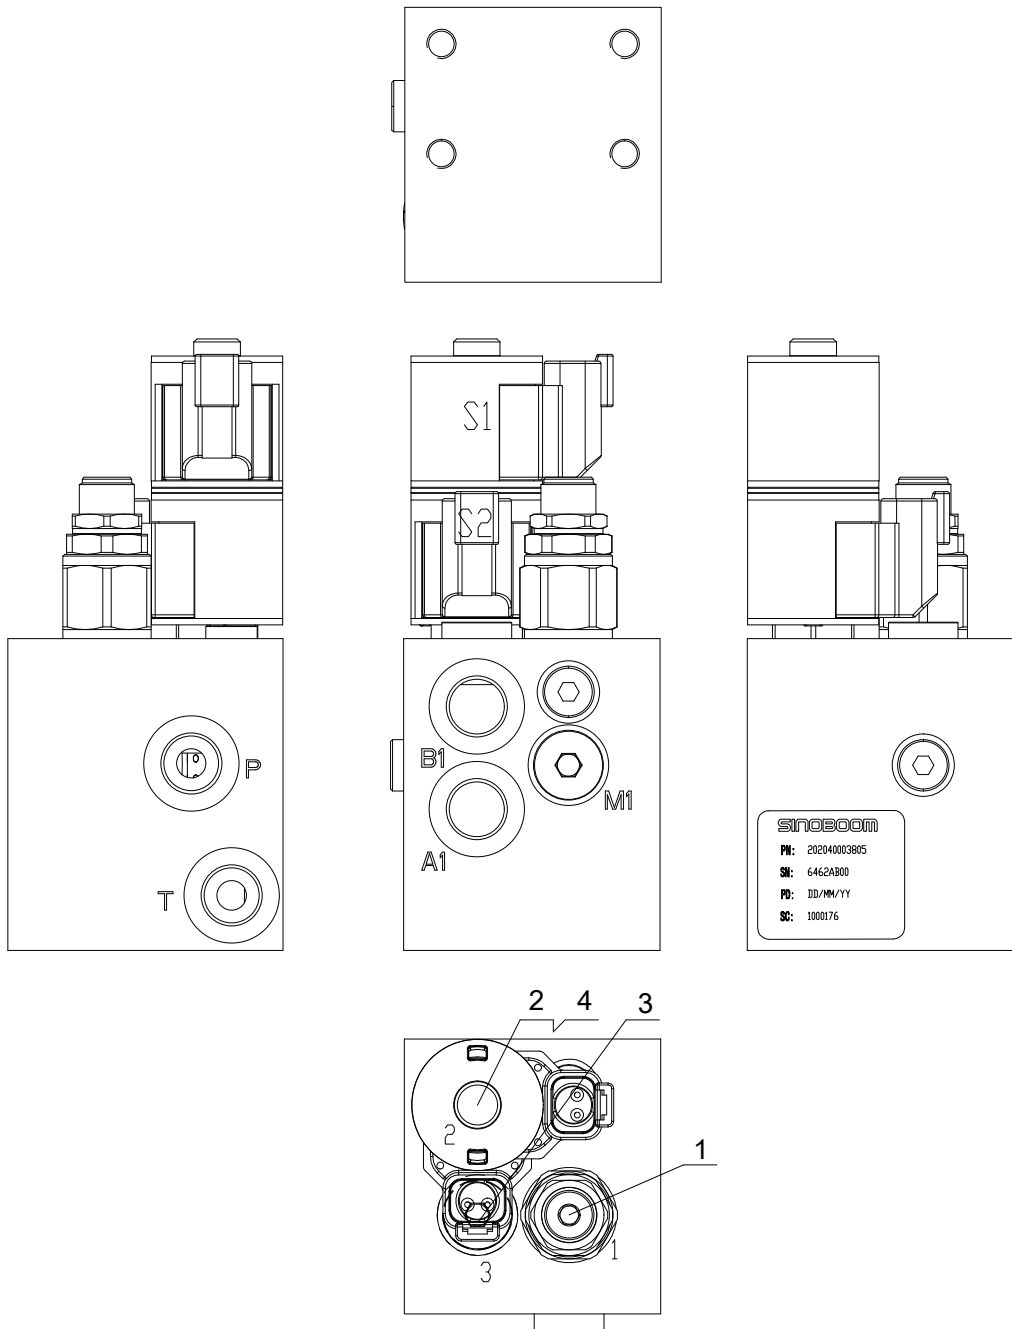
Steering Control Valve Manifold (PN.202040003804)
